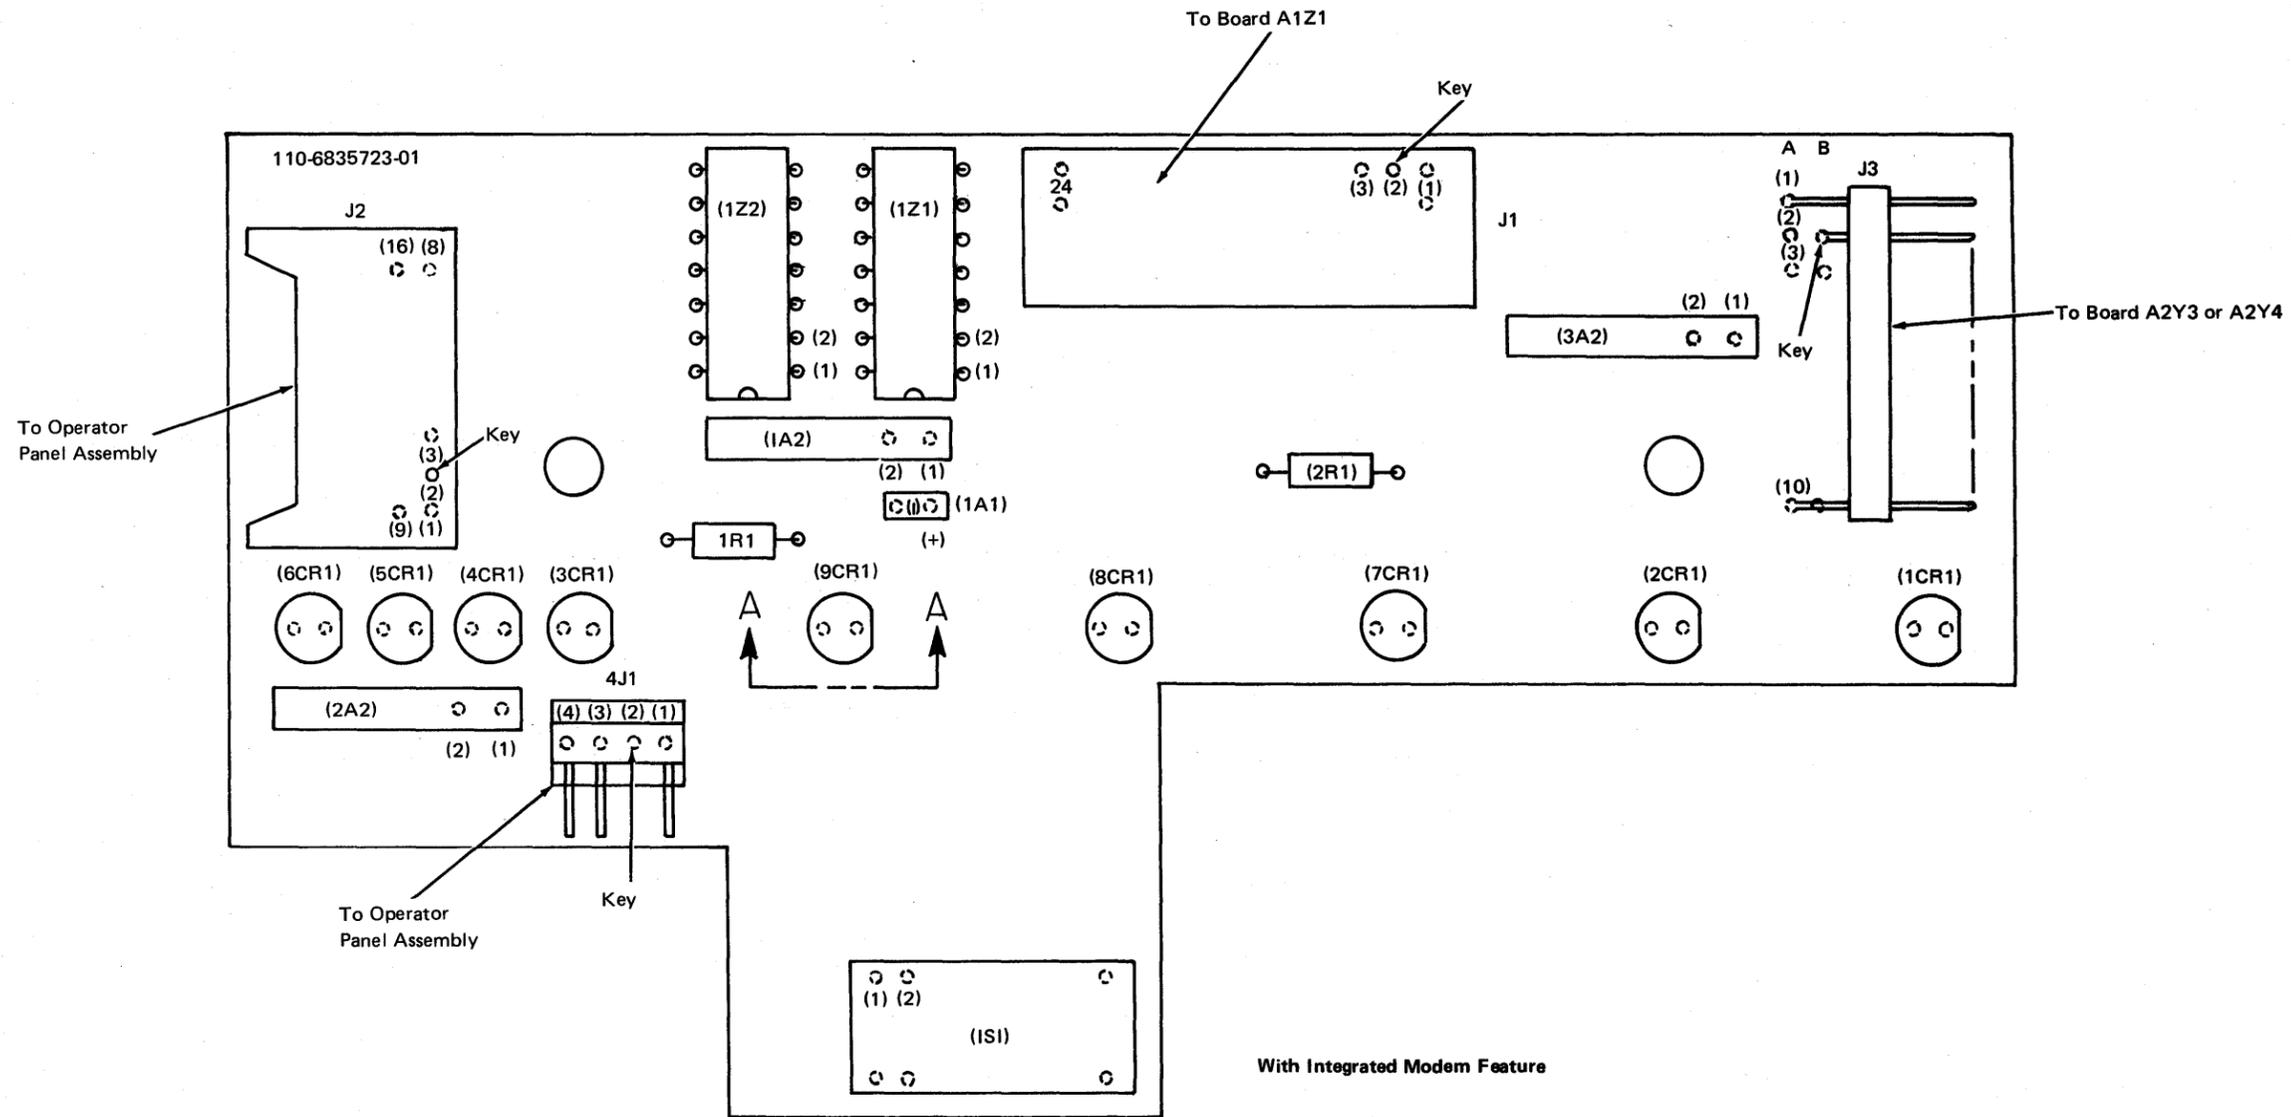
(Part 2 of 2). Operator Panel Indicator Card
